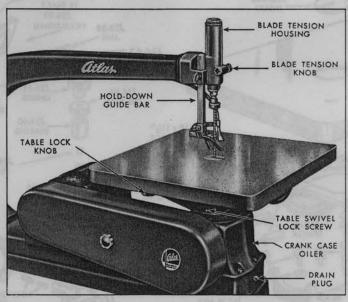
Controls on the ATLAS 24" Jig Saw.
